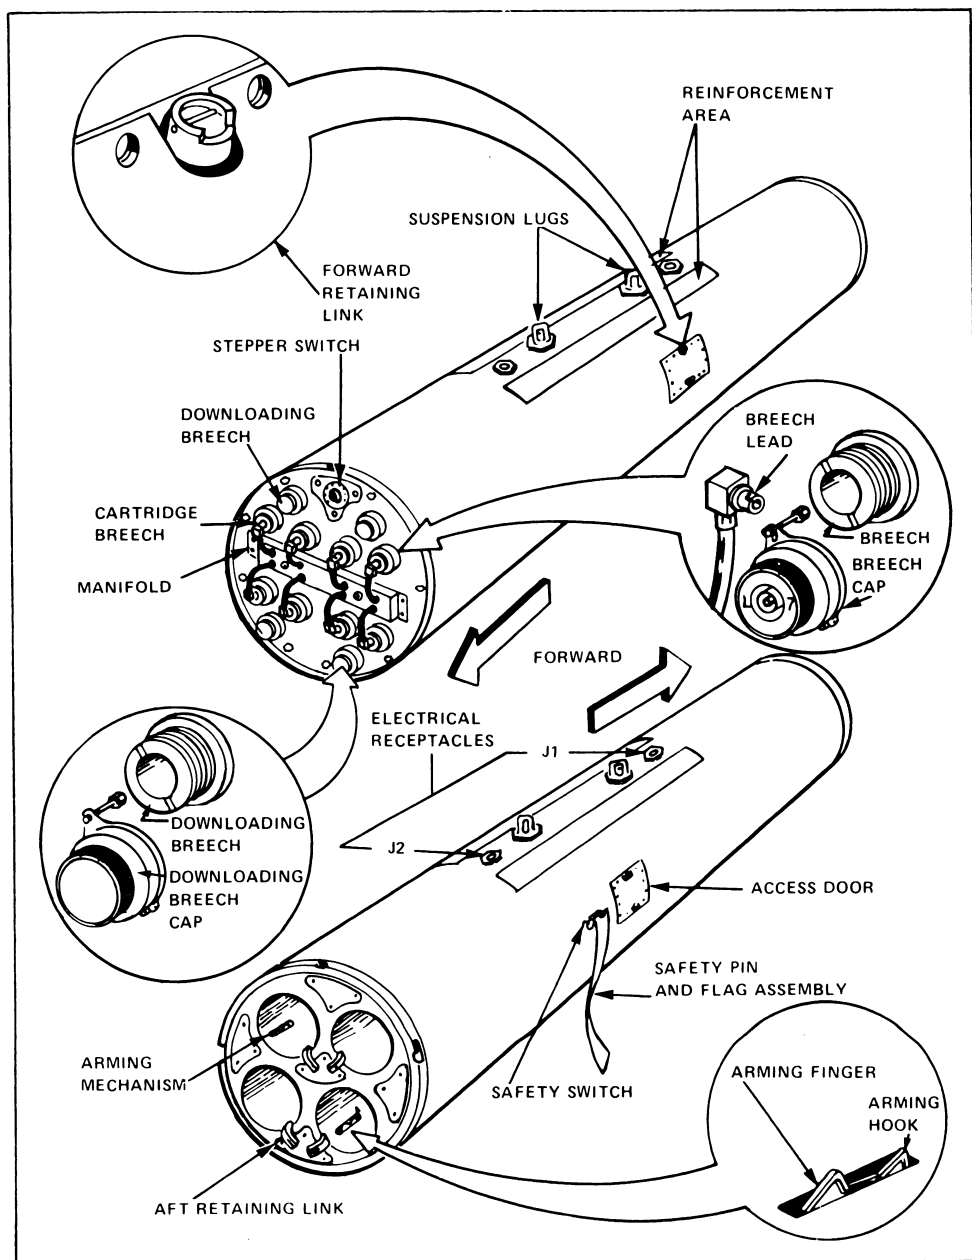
SUU-25F/A dispenser, exploded view.
